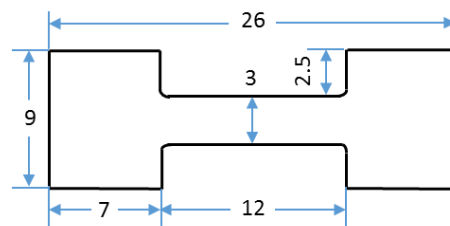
Sketch with dimensions of a miniature specimen used for tensile testing. All dimensions are in millimeters.
